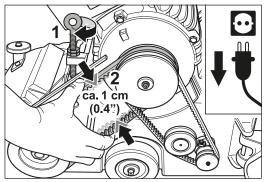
Tension the drive V-belt by turning the eye bolt at the motor clockwise (1).
